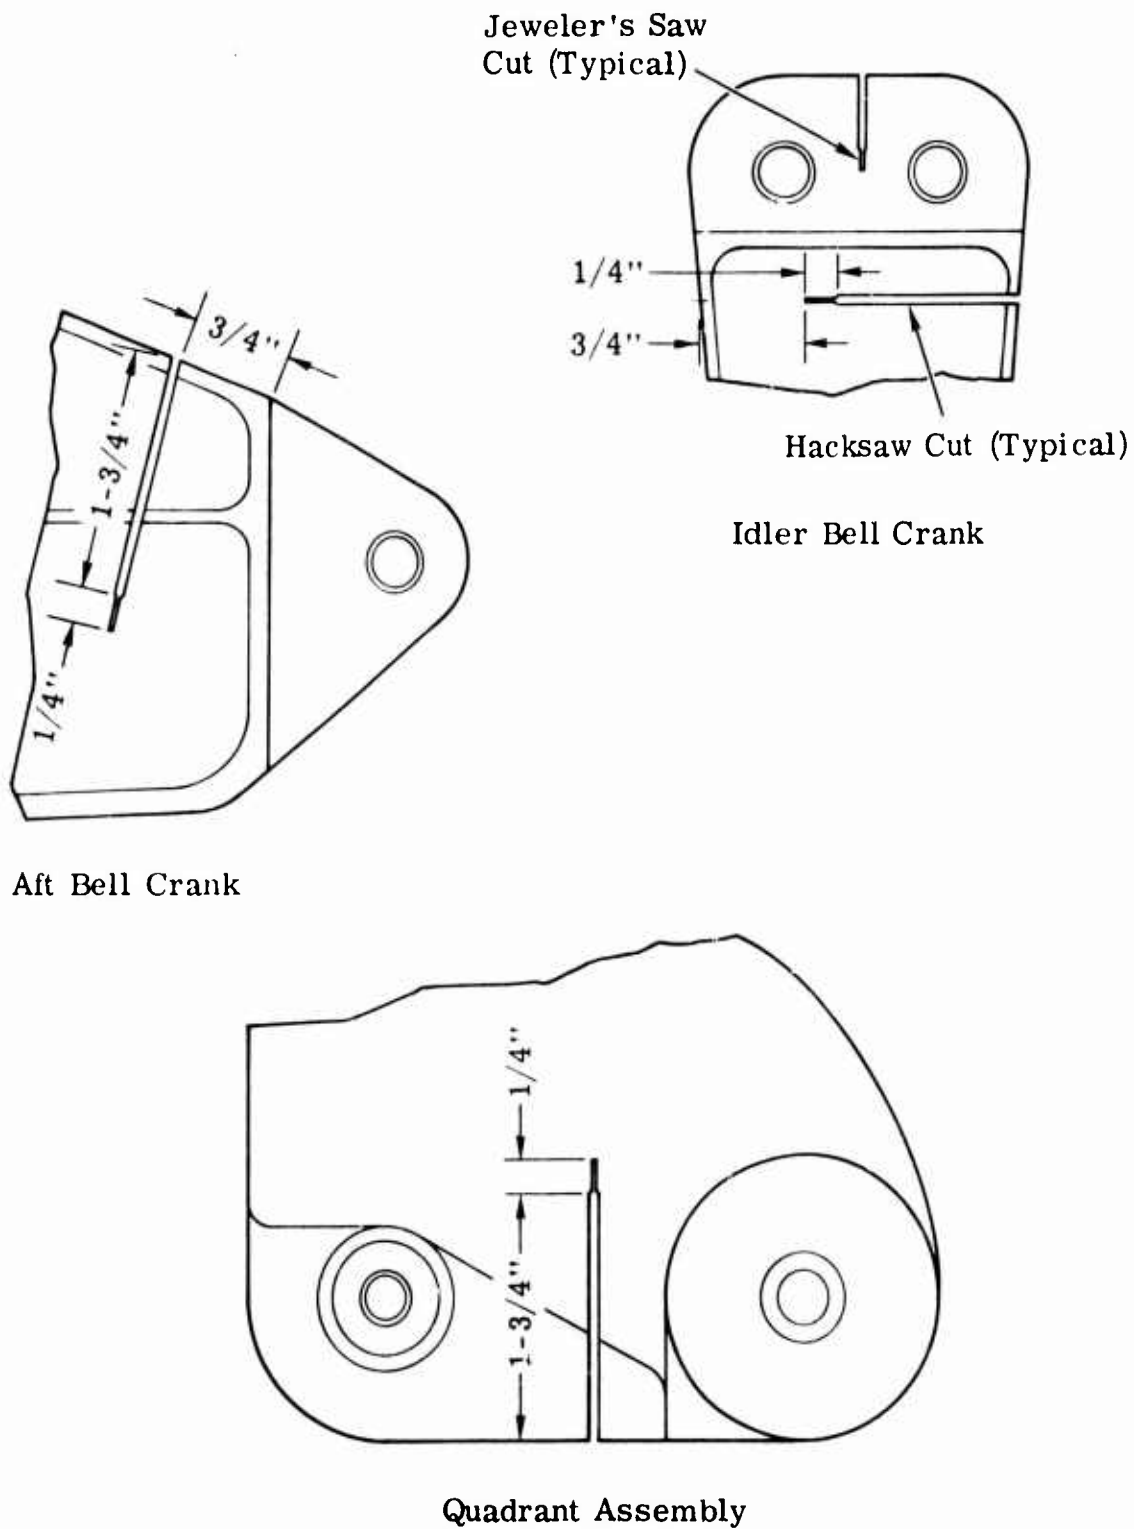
Location of Cracks in Test Specimens for Crack Propagation Tests.
